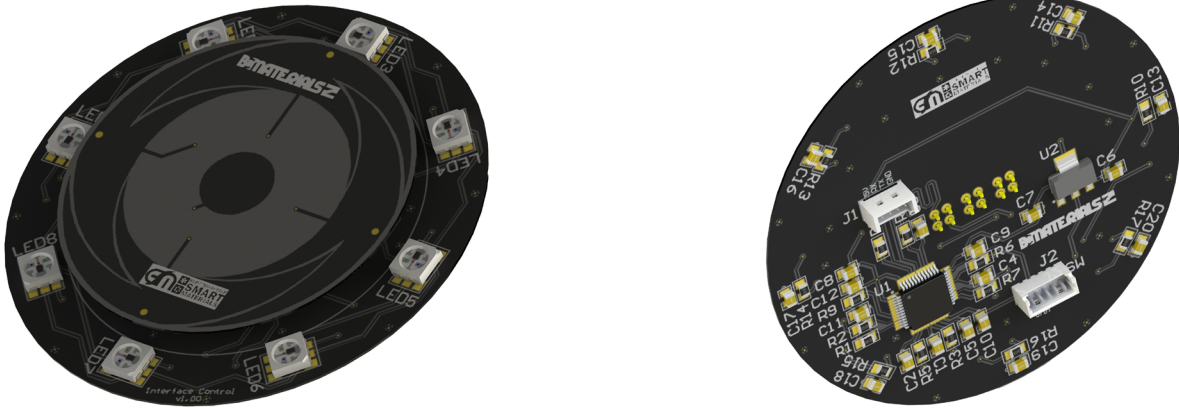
Touch Module board two PCB assembly composed by a copper board for touch capacitive buttons and interface control board composed by IC2 and D1 to D8 RGB LEDs from circuit in Figure 4.11.
